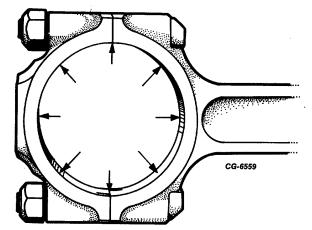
Connecting Rod Bearing Bore Out-Of-Round Measurement
